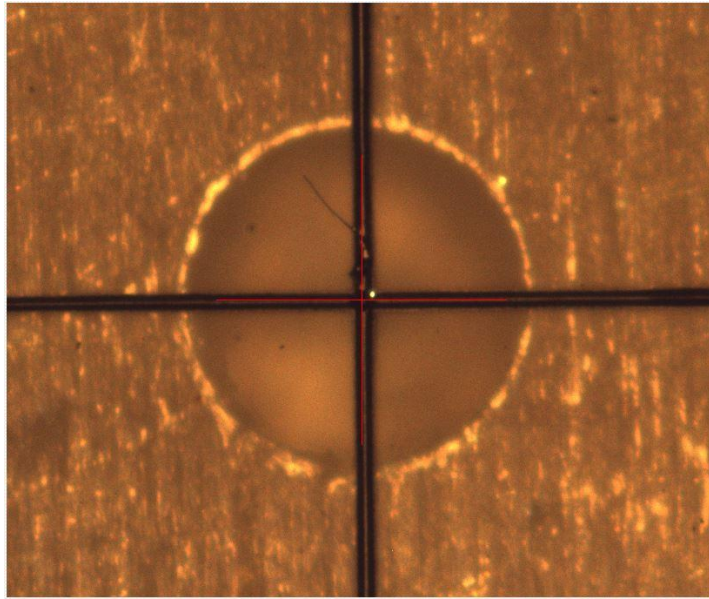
12 Alignment of sample chuck center and OPTOMECC® printer nozzle.
